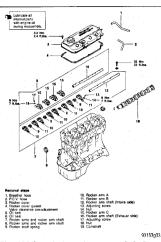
Camshaft, rocker arm and shaft assemblies—1.8L engine
